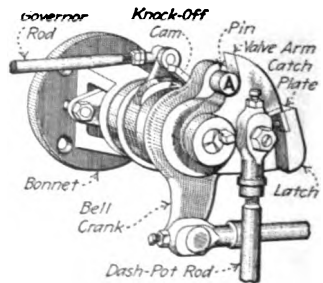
Corliss-valve trip gear as used in engines. (Vilter Mfg. Co.)
